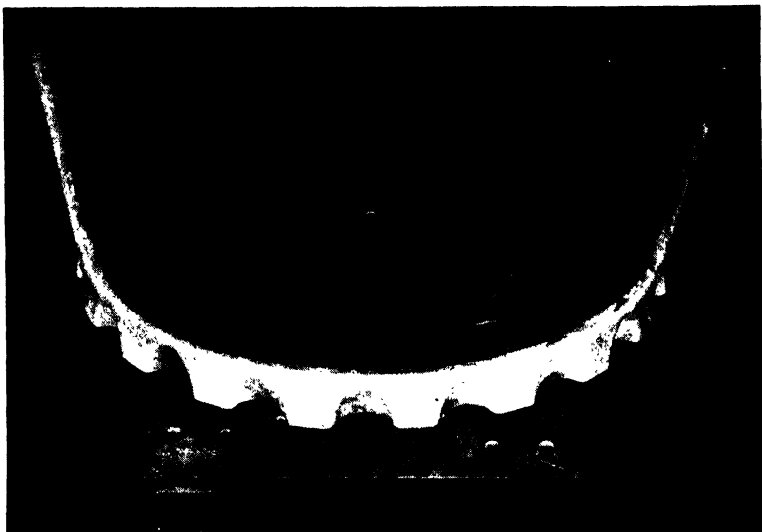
Illustrating how recessed scallops avoid gathering wrinkles in the edge of a piece when forming convex flanges by the Guerin process. (*Courtesy of Douglas Aircraft Company.*)
